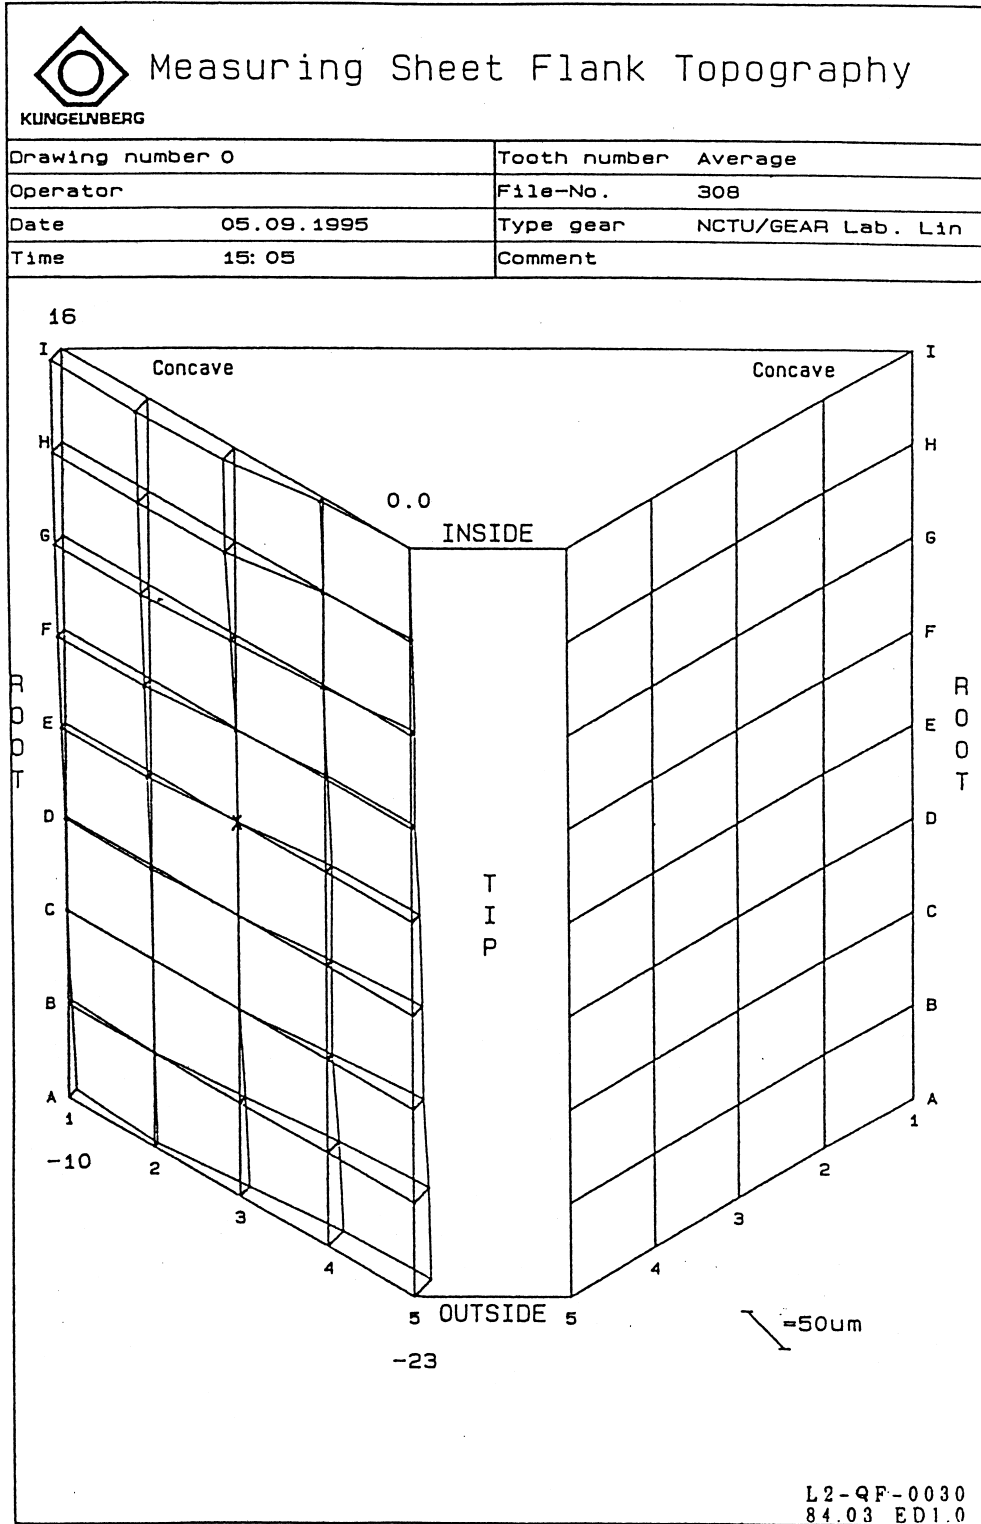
Pinion surface deviations on concave side cut by using corrective machine-tool settings.
